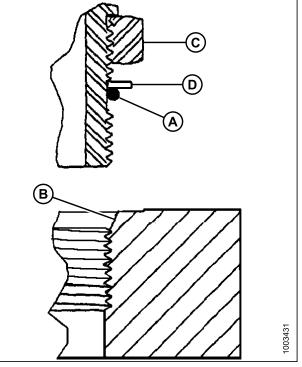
Hydraulic Fitting B - Seat A - O-Ring C - Nut D - Washer
